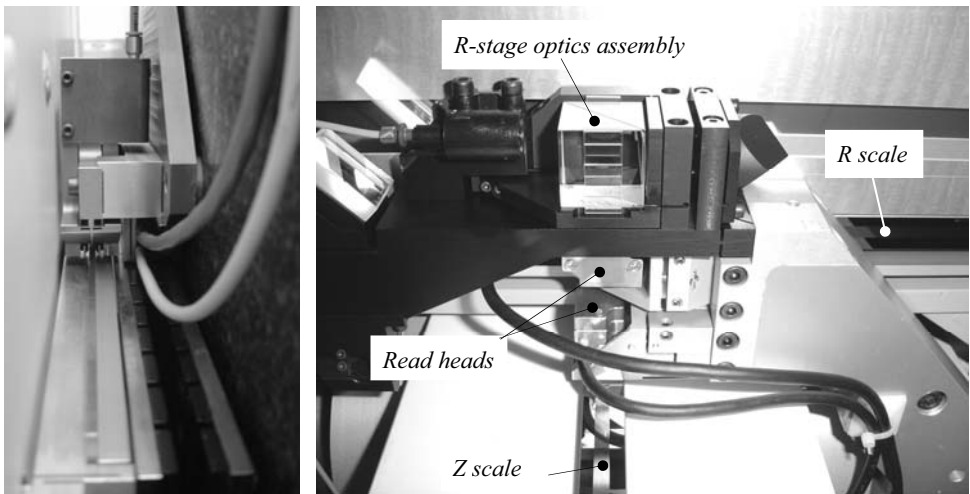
R-stage motor and brake, and linear scale read head assembly
